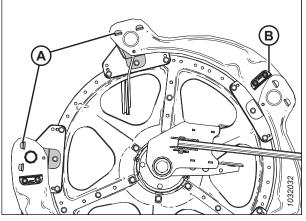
Reel Endshield Removed – Outboard Tail End
